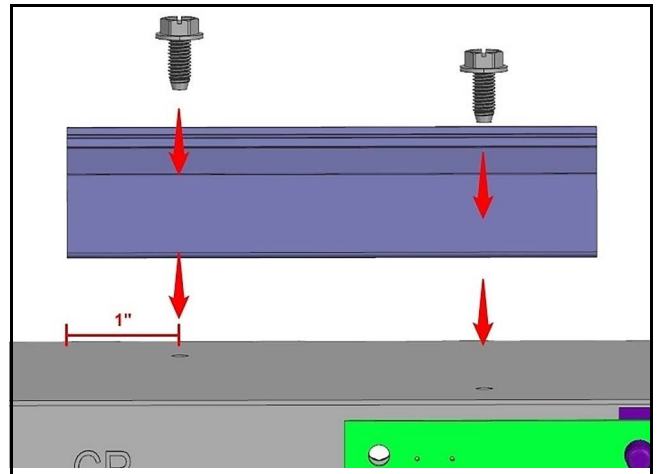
Installing the Mounting Base to the Control Box (LM)
